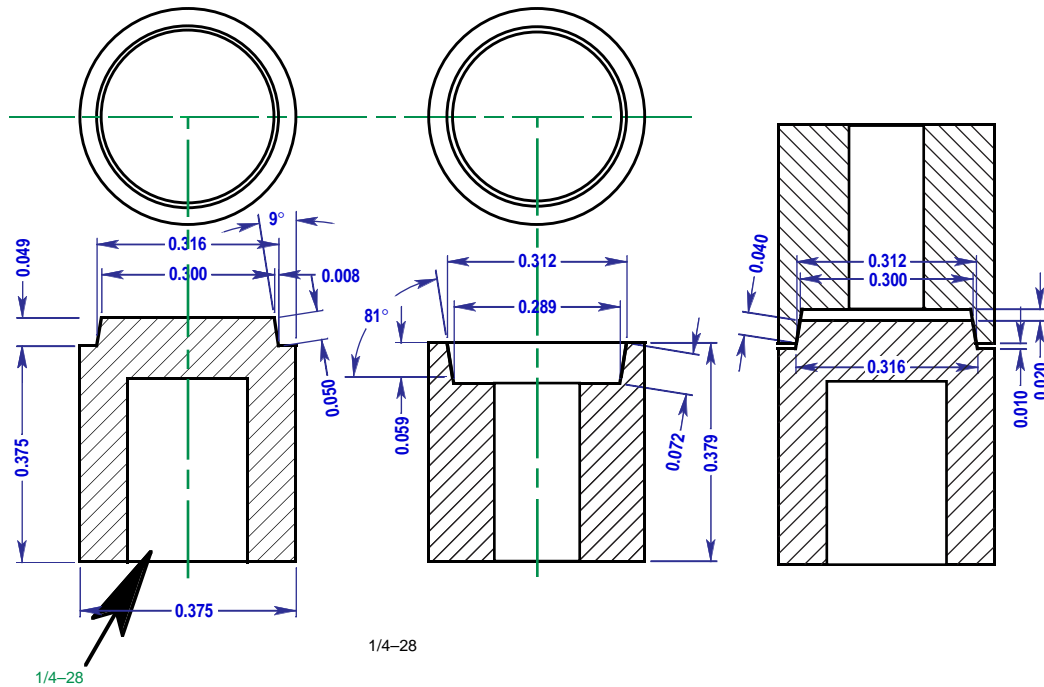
Sketch of the 9 deg cone seal test pieces: on the left is the male cone, in the middle is the female, and on the right they are shown mated.
